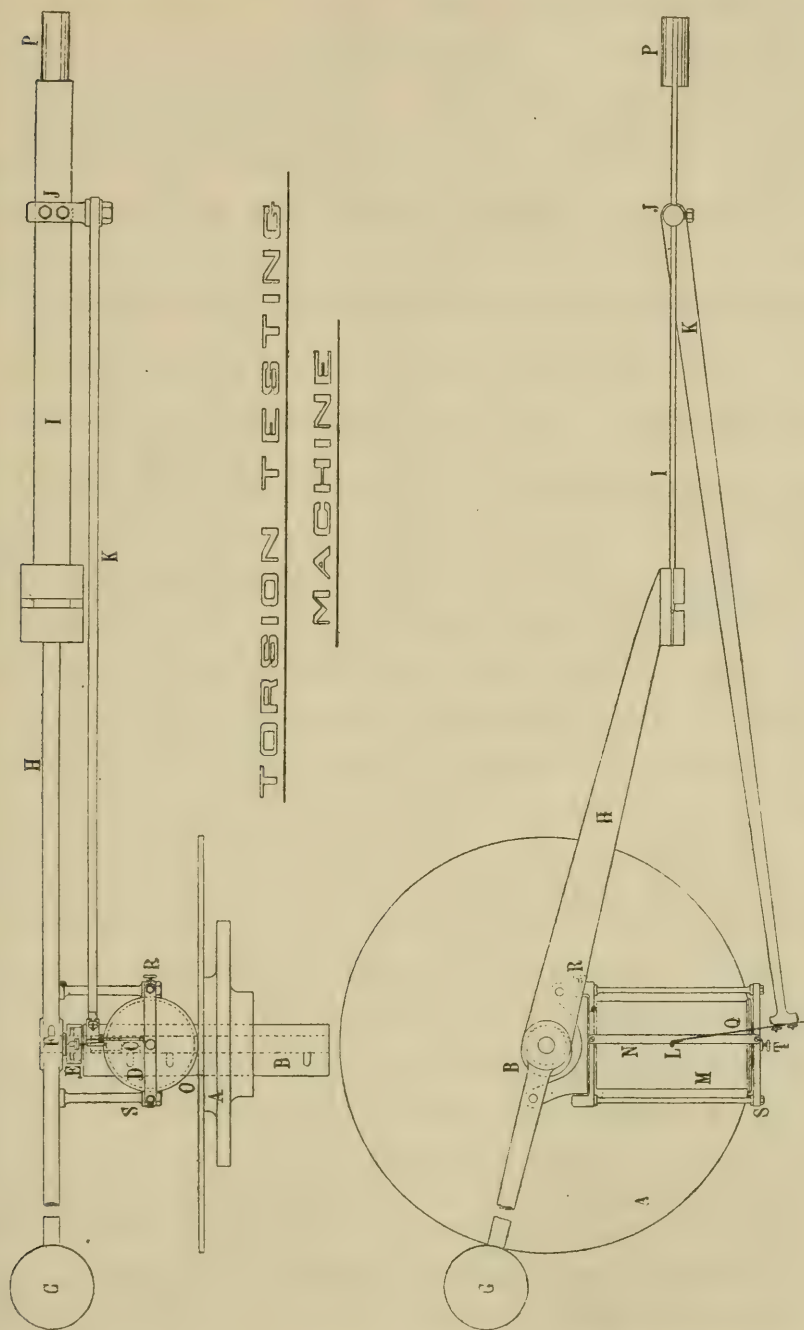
Professor Lilly's Reverse Torsion Machine.
